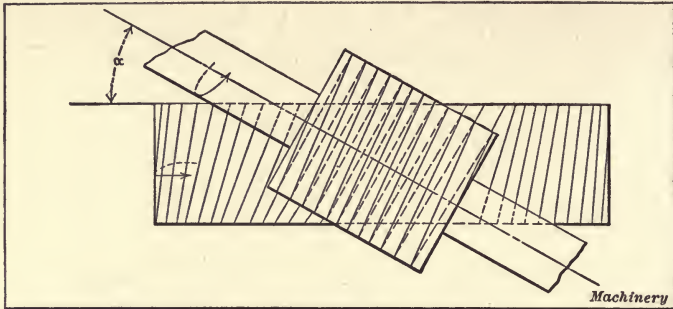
Cutting a Right-hand Spiral Gear with a Right-hand Hob
